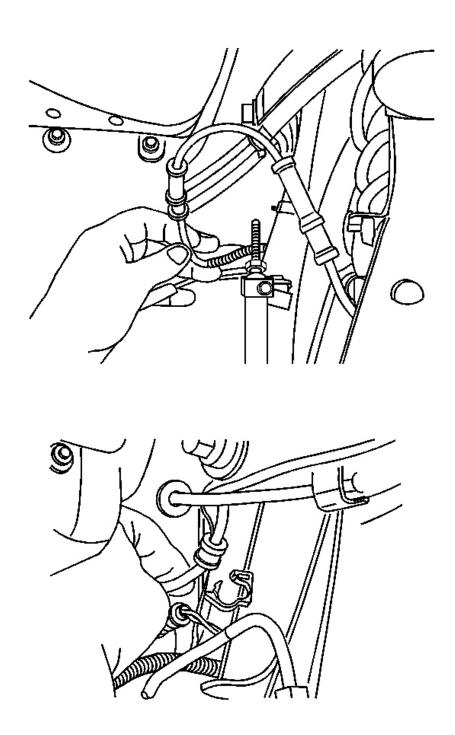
Identifying Wheel Speed Sensor Wiring Harness Courtesy of GENERAL MOTORS CORP.
